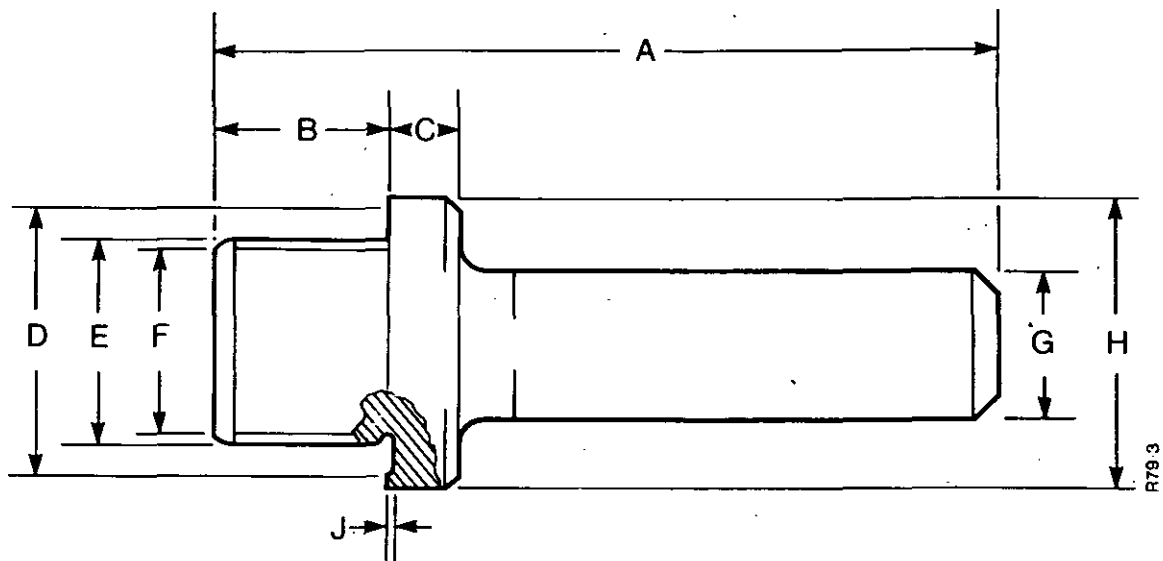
TOOL FOR INSTALLING OIL SEALS
